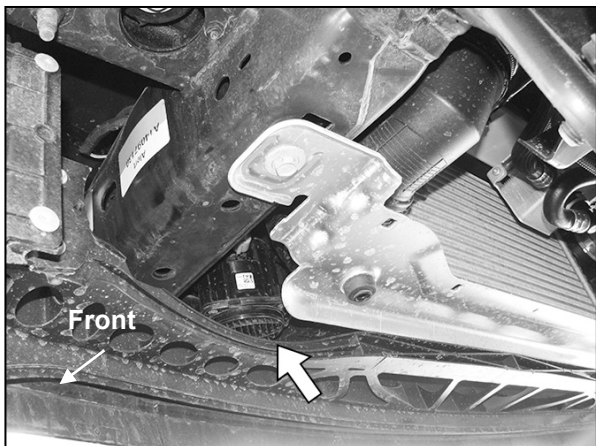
Remove bolts (arrows) to remove active air dam from motors (passenger/right side pictured)
